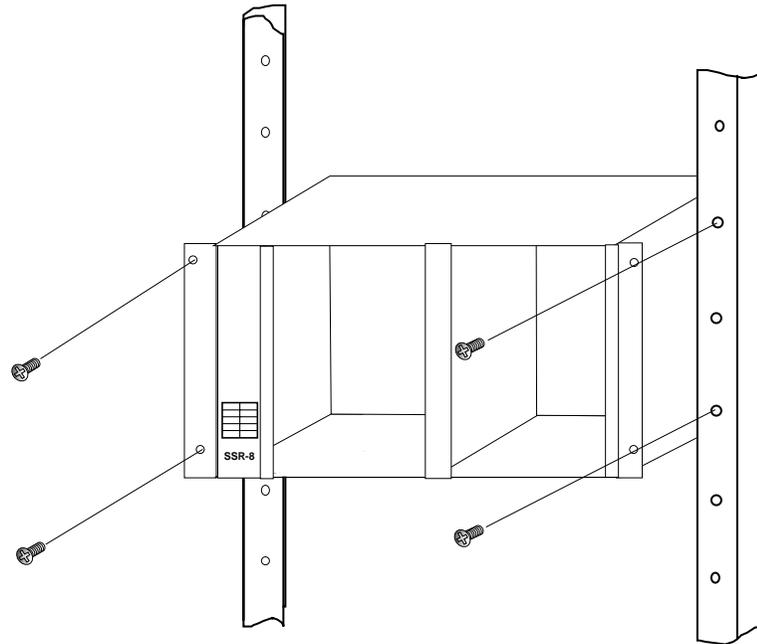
Installing the X-Pedition 8600 chassis in an equipment rack
